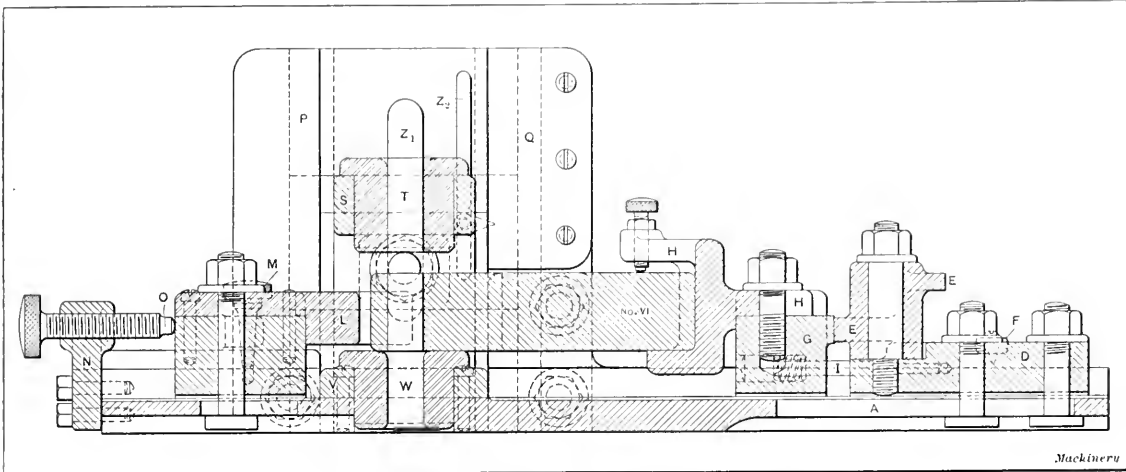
Cross-sectional View of the Universal Drill Jig on Line a-b
